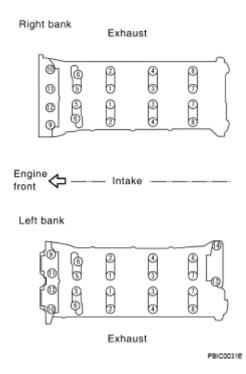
Identifying Intake And Exhaust Camshaft Brackets
